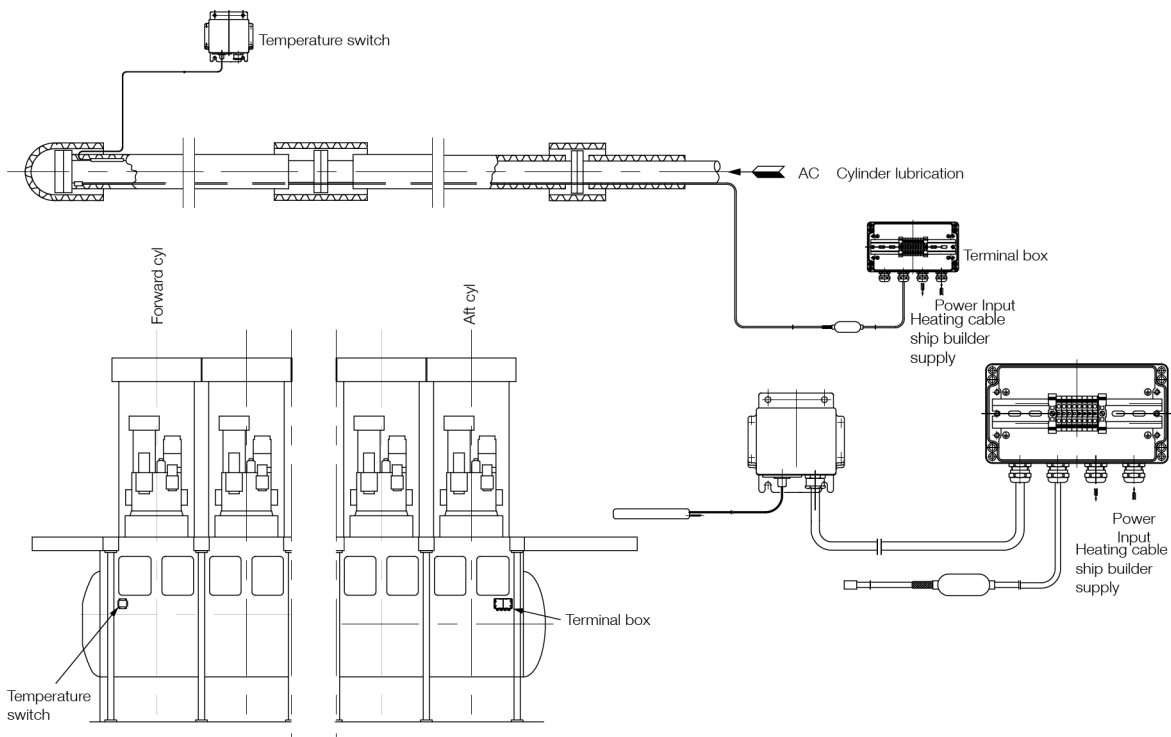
Cylinder lubricating oil pipes, Alpha Mk 2 lubricator
